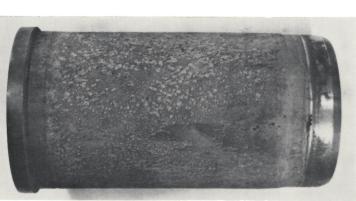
Typical Examples of Cavitation Damage to Diesel Engine Cylinder Liners.
